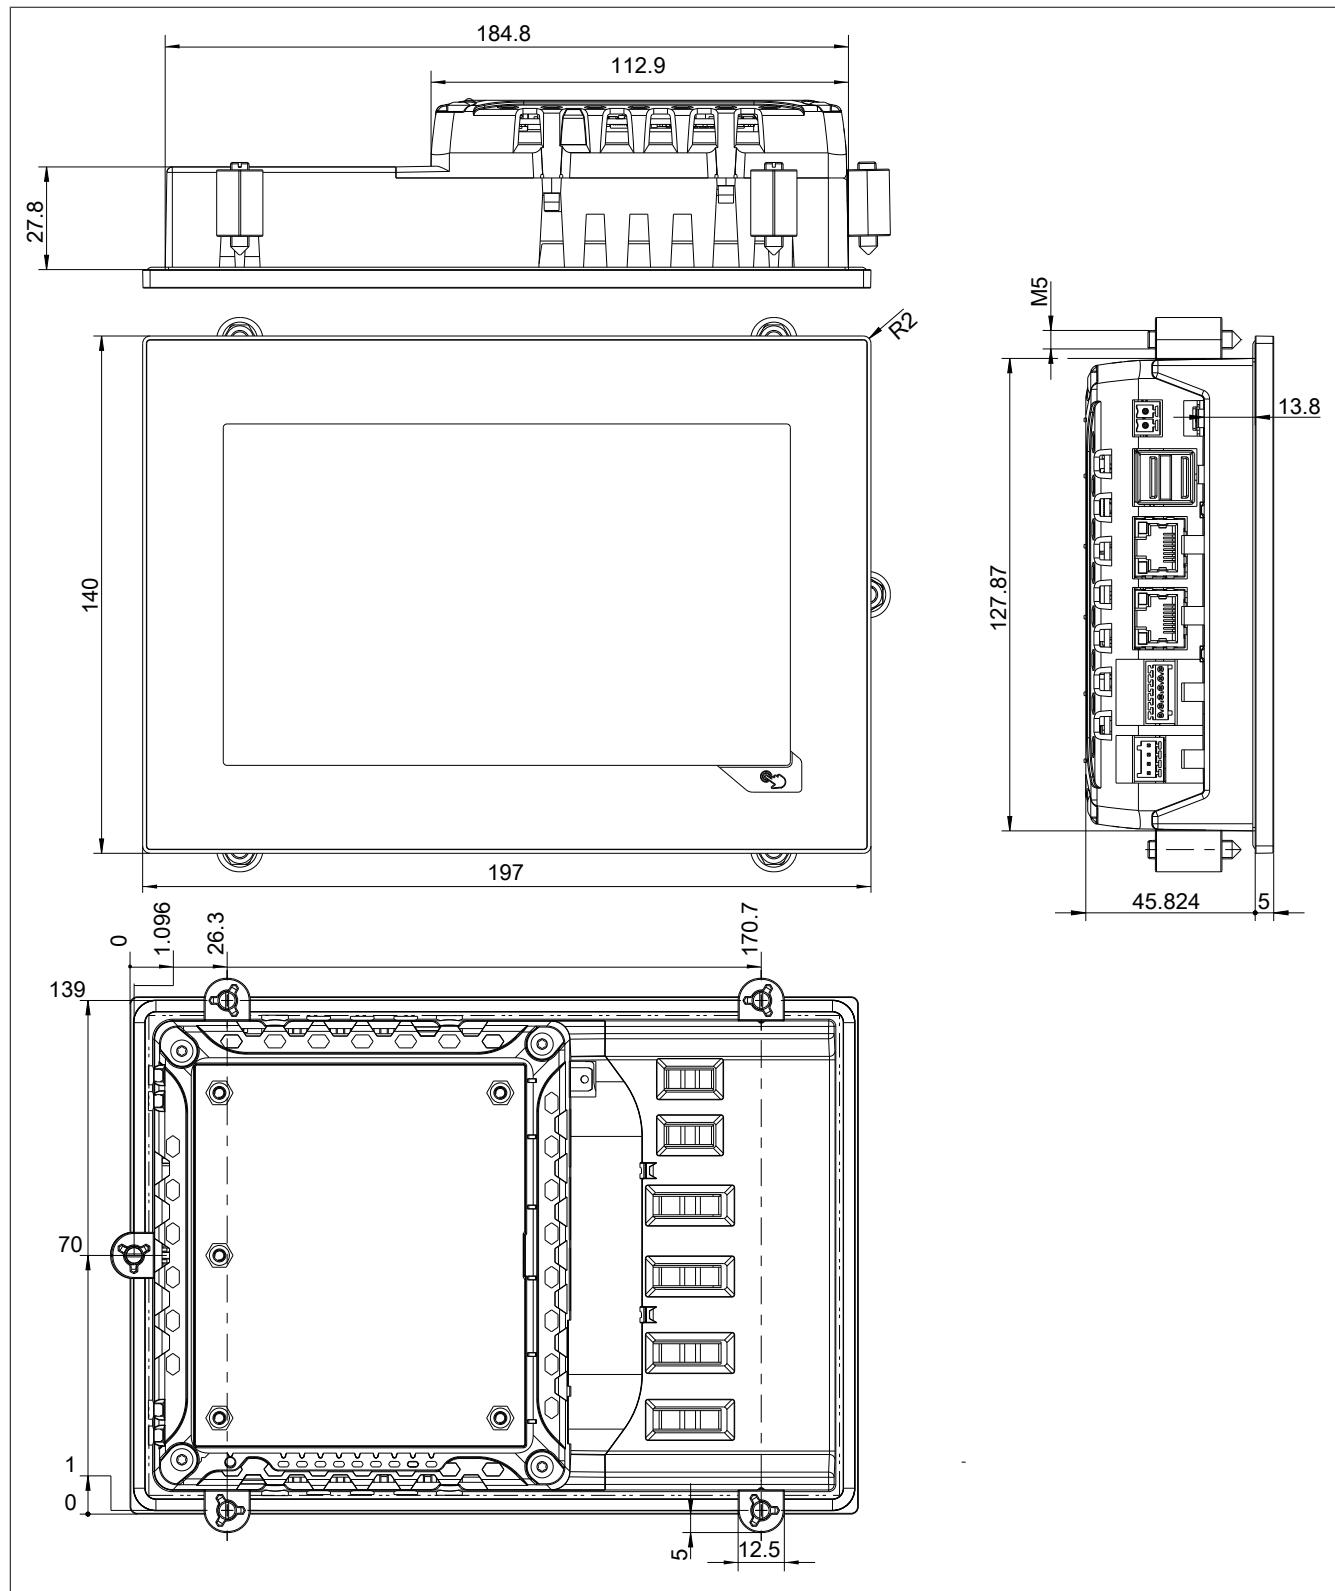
Dimensions - 4PPC70.070x-2xx - 4PPC70.0702
